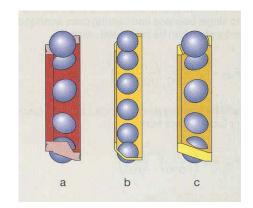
a) Molded, b) pressed (stamped) and c) machined cage
